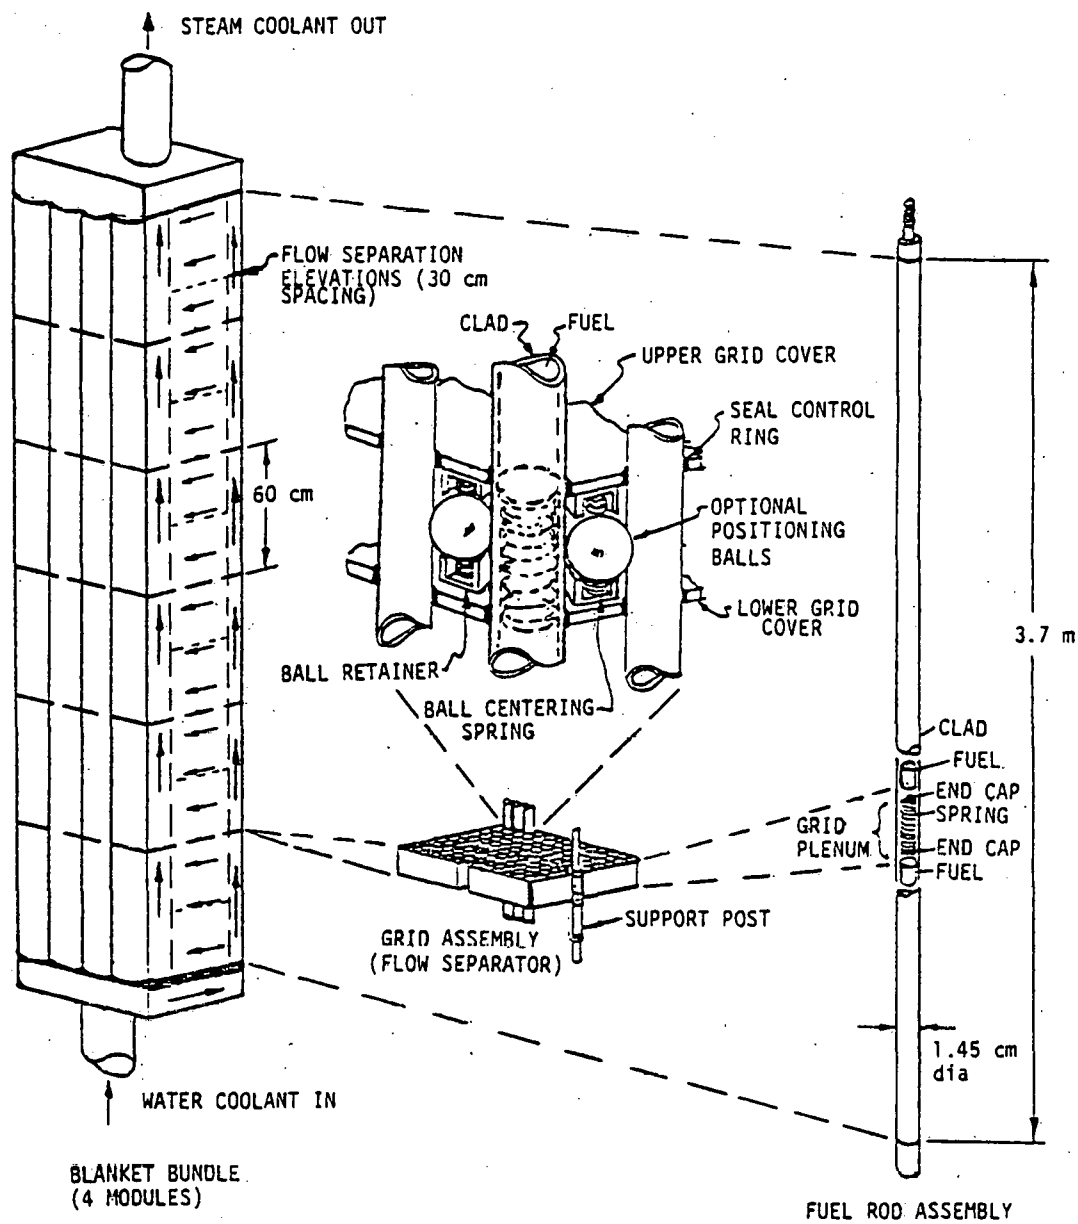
DTHR Fuel Rod Assembly - Grid Assembly Conceptual Design.
